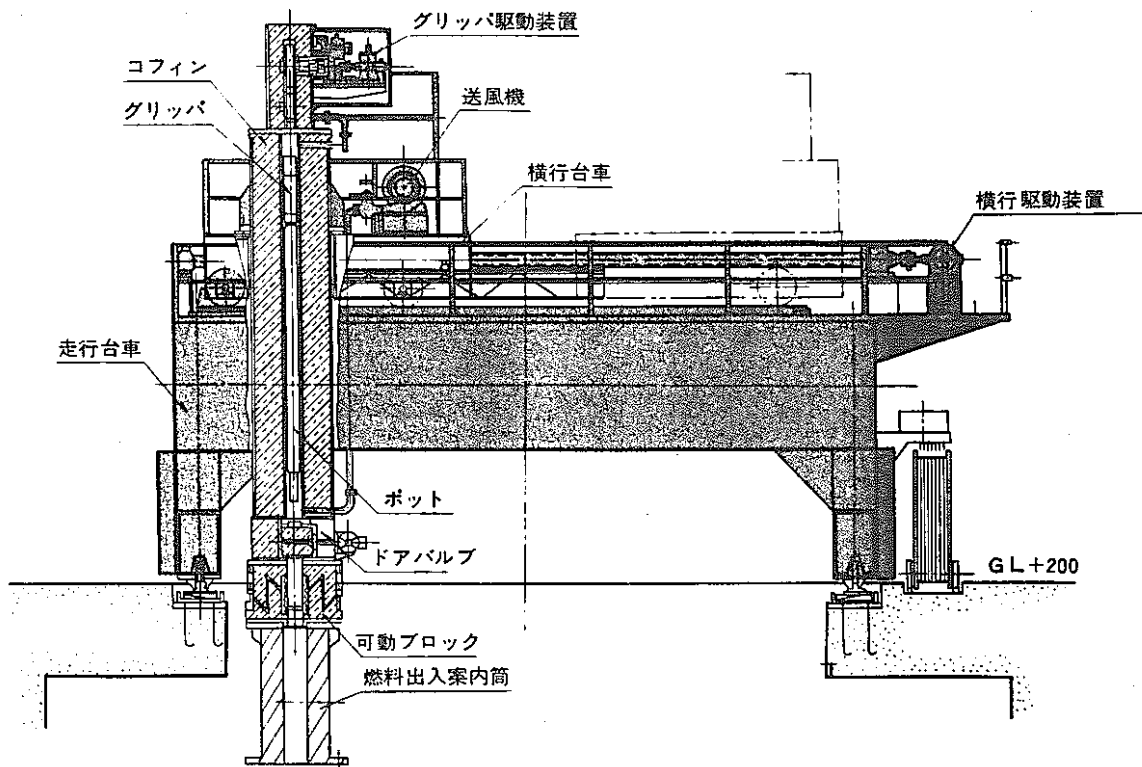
Outline of the In-Core-Charging Machine
